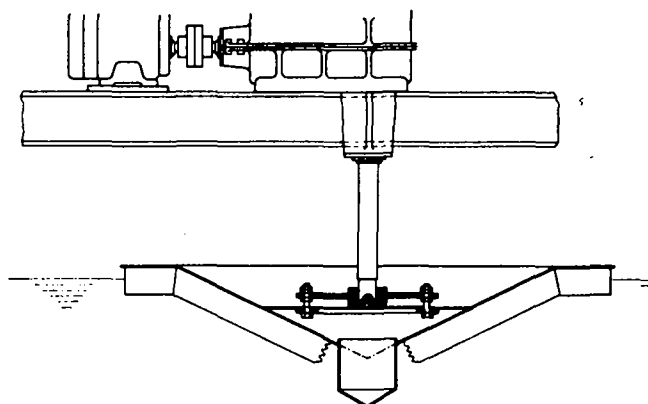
SIMCAR-CONE WITH HORIZONTAL MOTOR AND GEAR REDUCER
